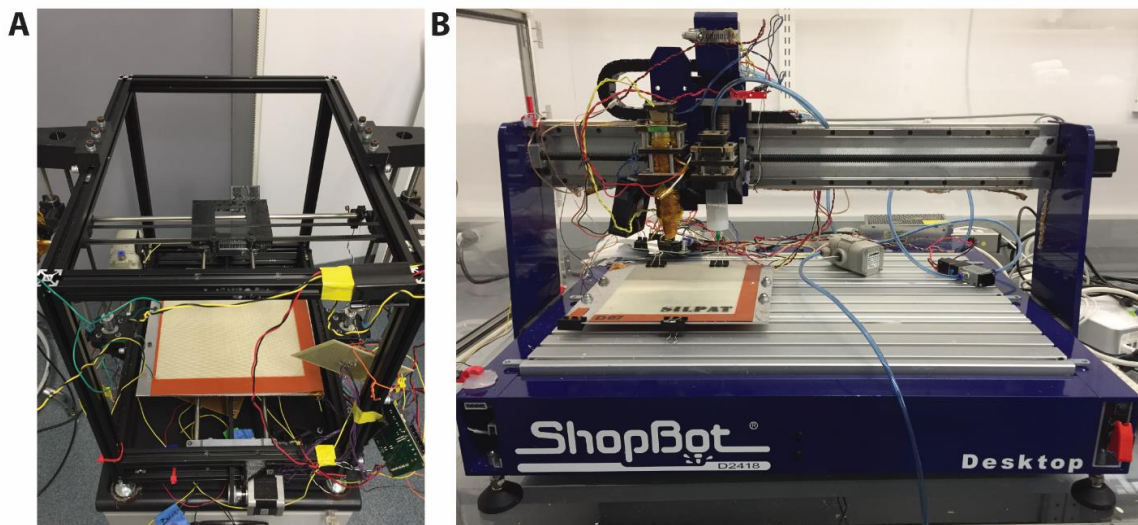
A) The custom-modified RepRap Mendel 3D printer used in the previous 3D sugar printing method. B) The ShopBot Desktop modified to use for 3D printing sugar.
